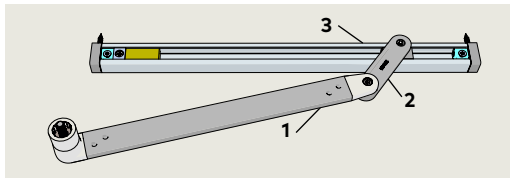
T275 – Splined pull arm assembly, RH, 1 - 2 3/4" reveal
